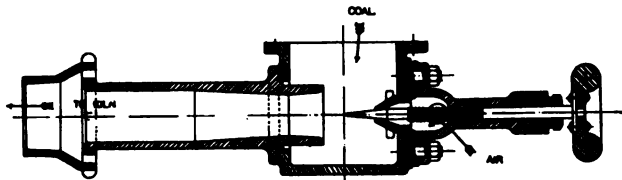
SECTIONAL VIEW OF ATLAS BURNER
